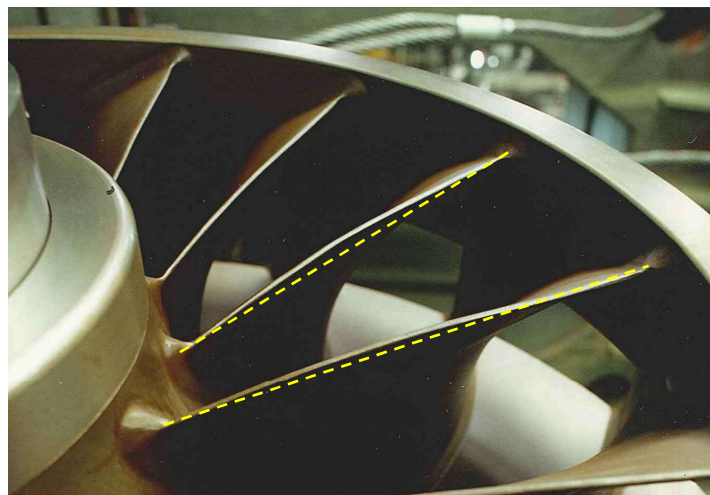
Example of blade leading edge distortion due to fillet welding and heat treatment
